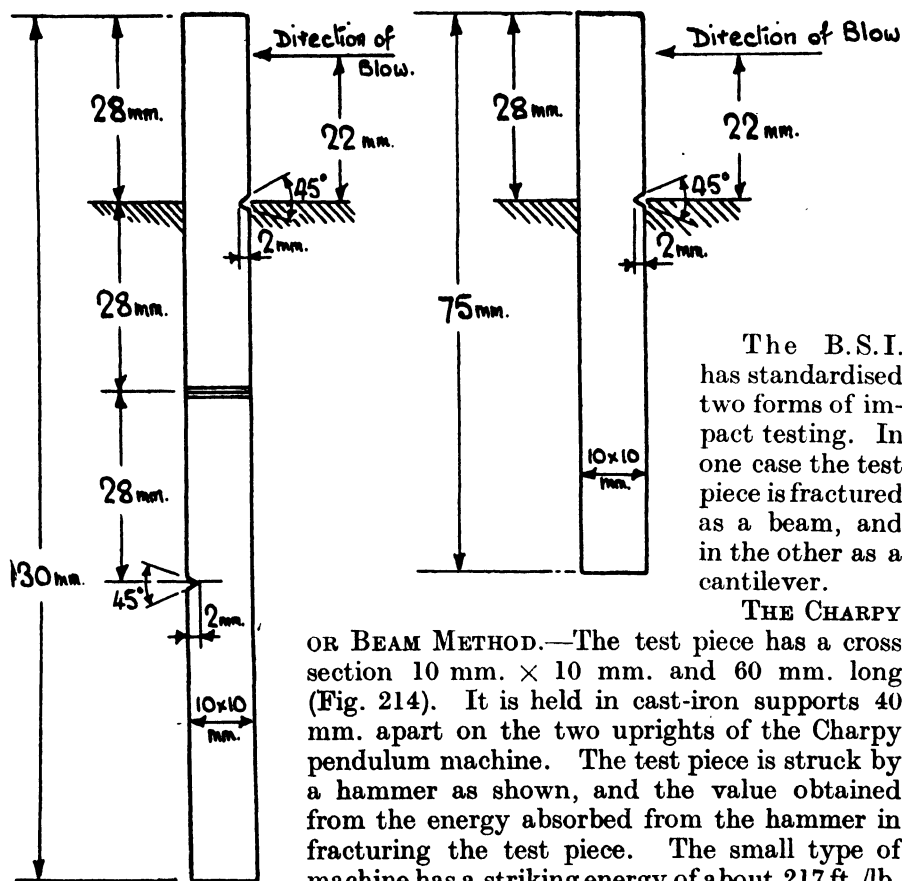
IZOD OR CANTILEVER TEST PIECES
